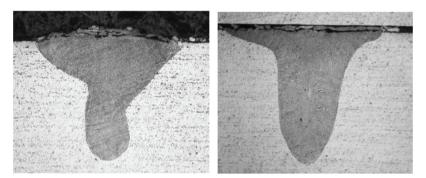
Microstructure of welded points, x50: welding is executed in the open atmosphere (a), welding is executed in a low vacuum (b).
